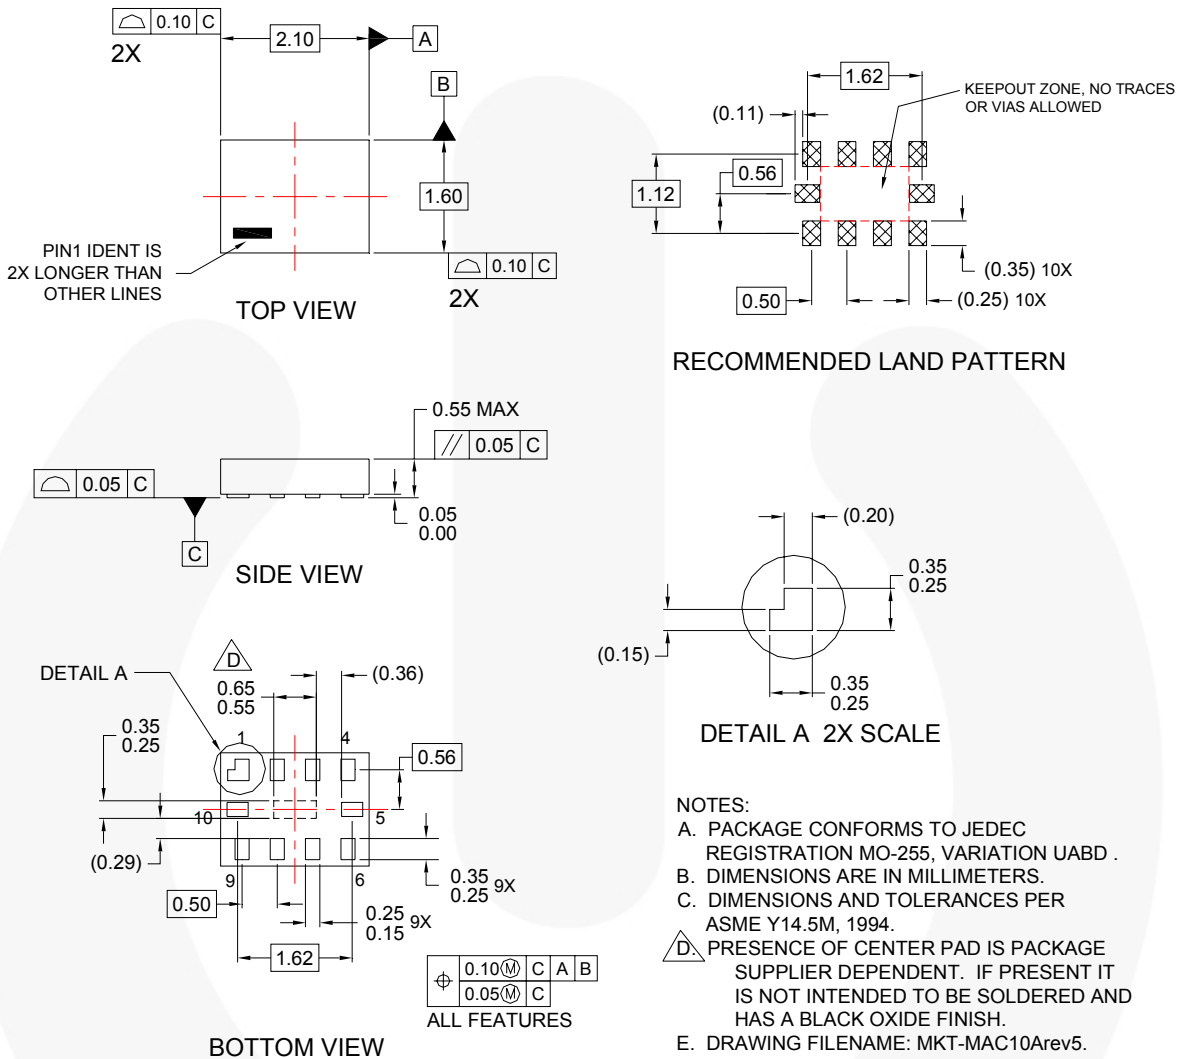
10-Lead Quad Ultrathin Molded Leadless Package (UMLP)
